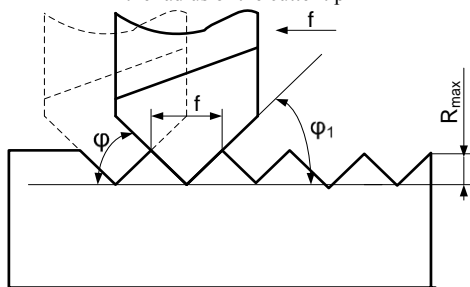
Sketch for machining a surface, not taking into account the radius of the cutter tip r
